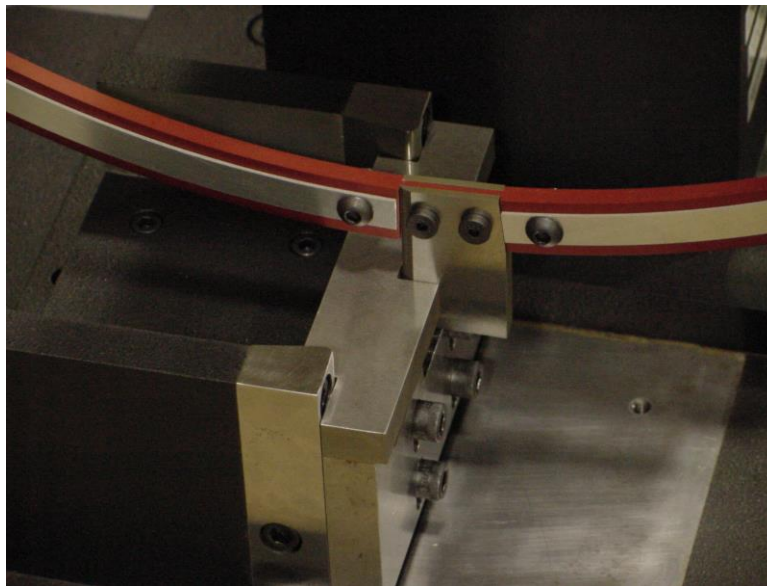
This shows the Charpy centering tool placed in the fixture. The fixture is moved until the striker enters the slot, then the fixture is bolted down.
